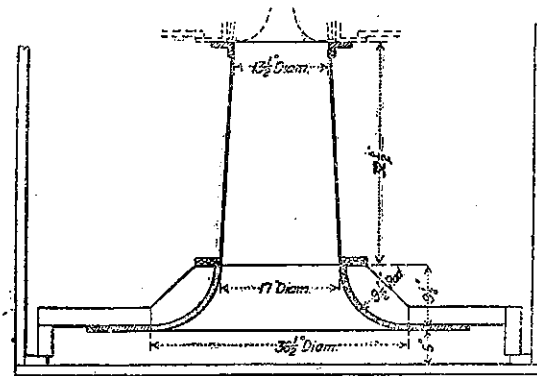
COMBINATION OF STRAIGHT DRAFT TUBE AND HYDRAUCONE REGAINER WITH FLAT PLATE
